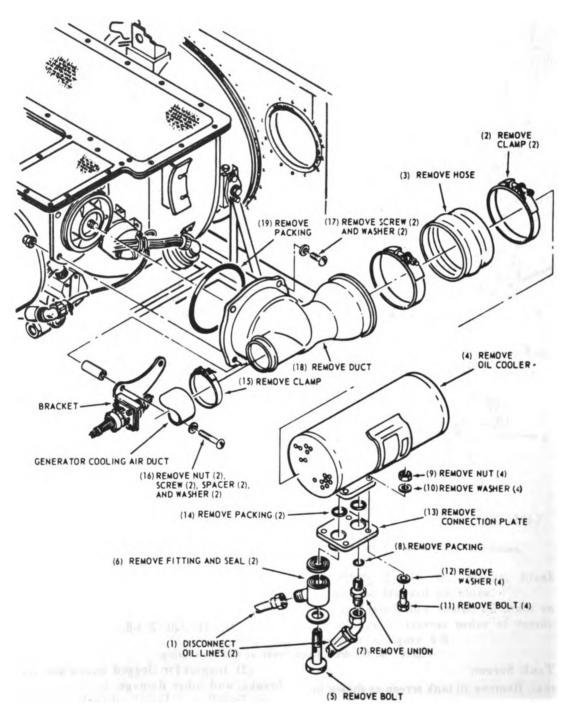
Oil cooler, oil cooler air duct, and hose, removal and installation.
